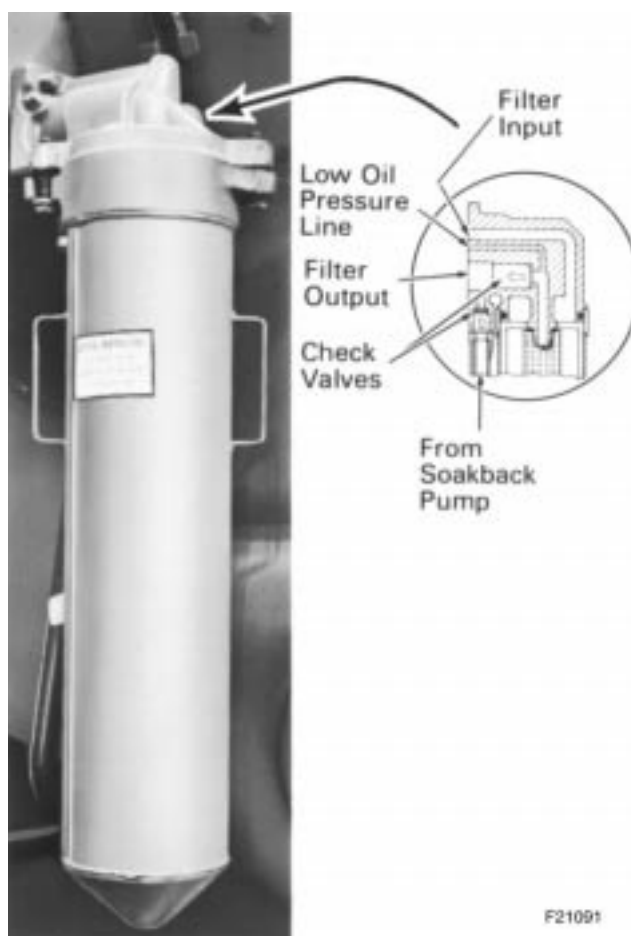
Turbocharger Oil Filter Assembly. (Cartridge Type Shown)
